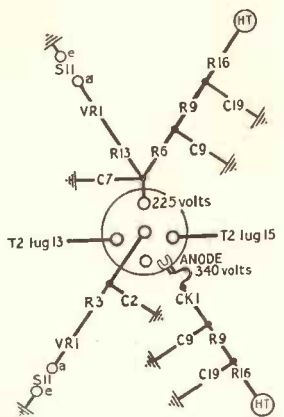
COMPONENTS CONNECTED TO THE INTERMEDIATE FREQUENCY VALVE HOLDER.
